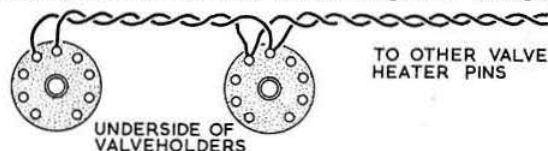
Details of the heater wiring. Twisted flex should be used. One side of the heater wiring is connected to earth at the mains transformer end only. This method of wiring reduces mains hum to a minimum.
